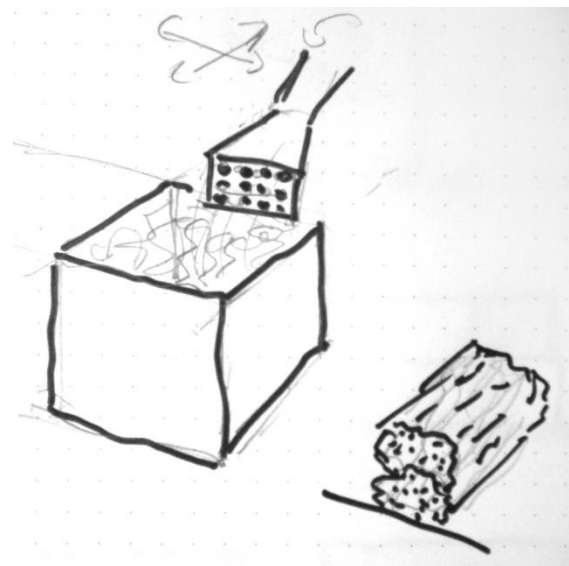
, Filling the box with the extruded material mixture chaotically. Straight chaotically extrusion
